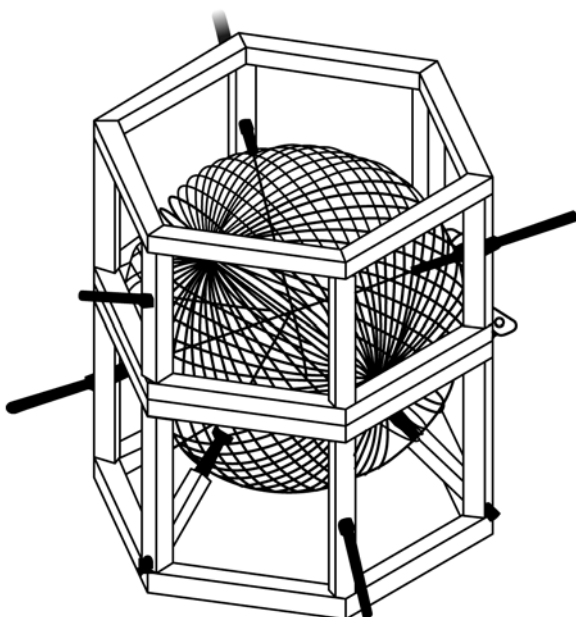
AE Sensor Holding Fixture (sensors on the head of the spring loaded rods)
